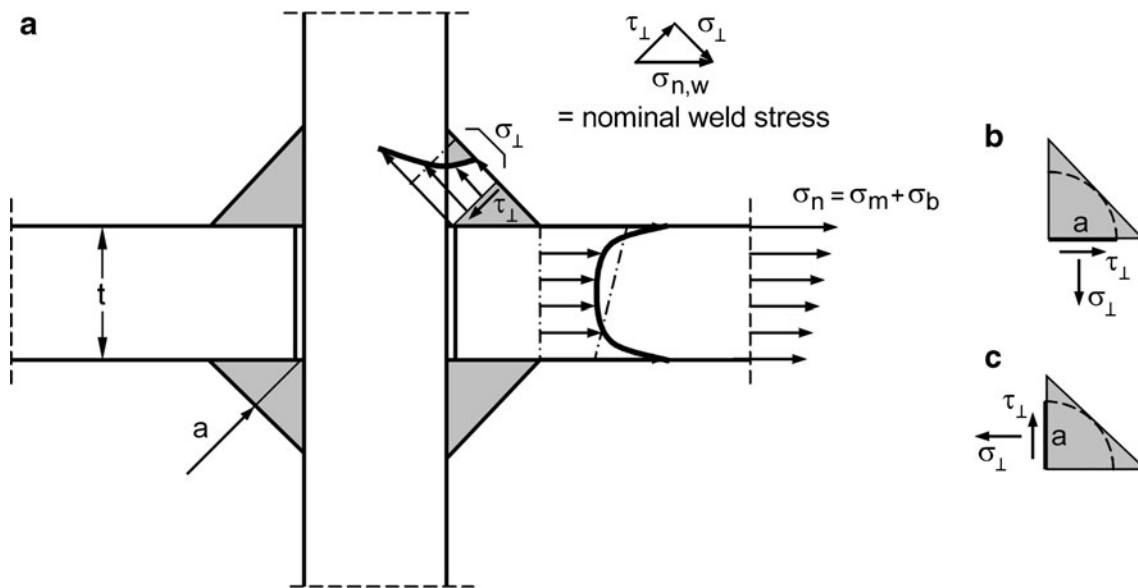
Fillet-welded cruciform joint with nominal stresses in plate and weld
